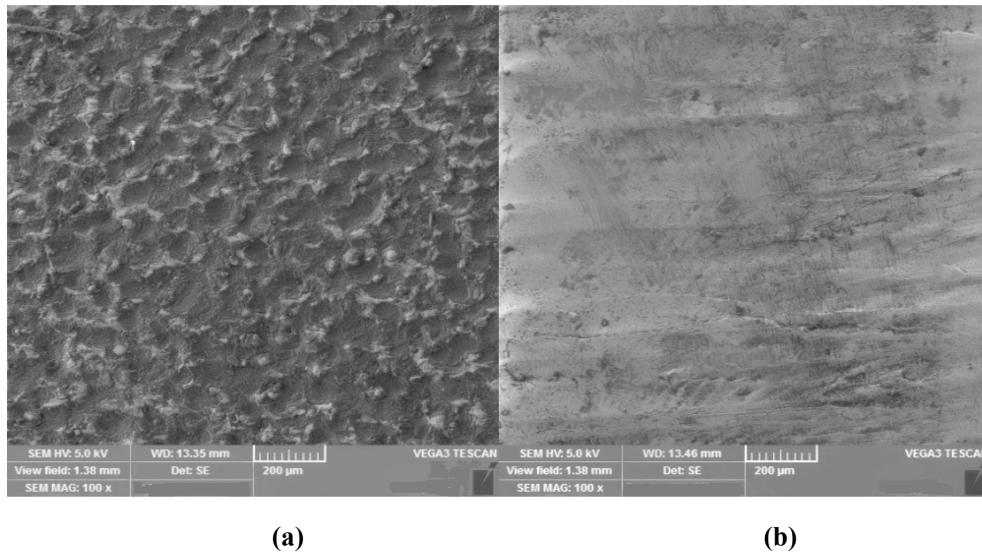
| SEM image of AISI 316 L cut surface (a) EDM wire cut and (b) laser cut for 2.5 mm thick sheet.
